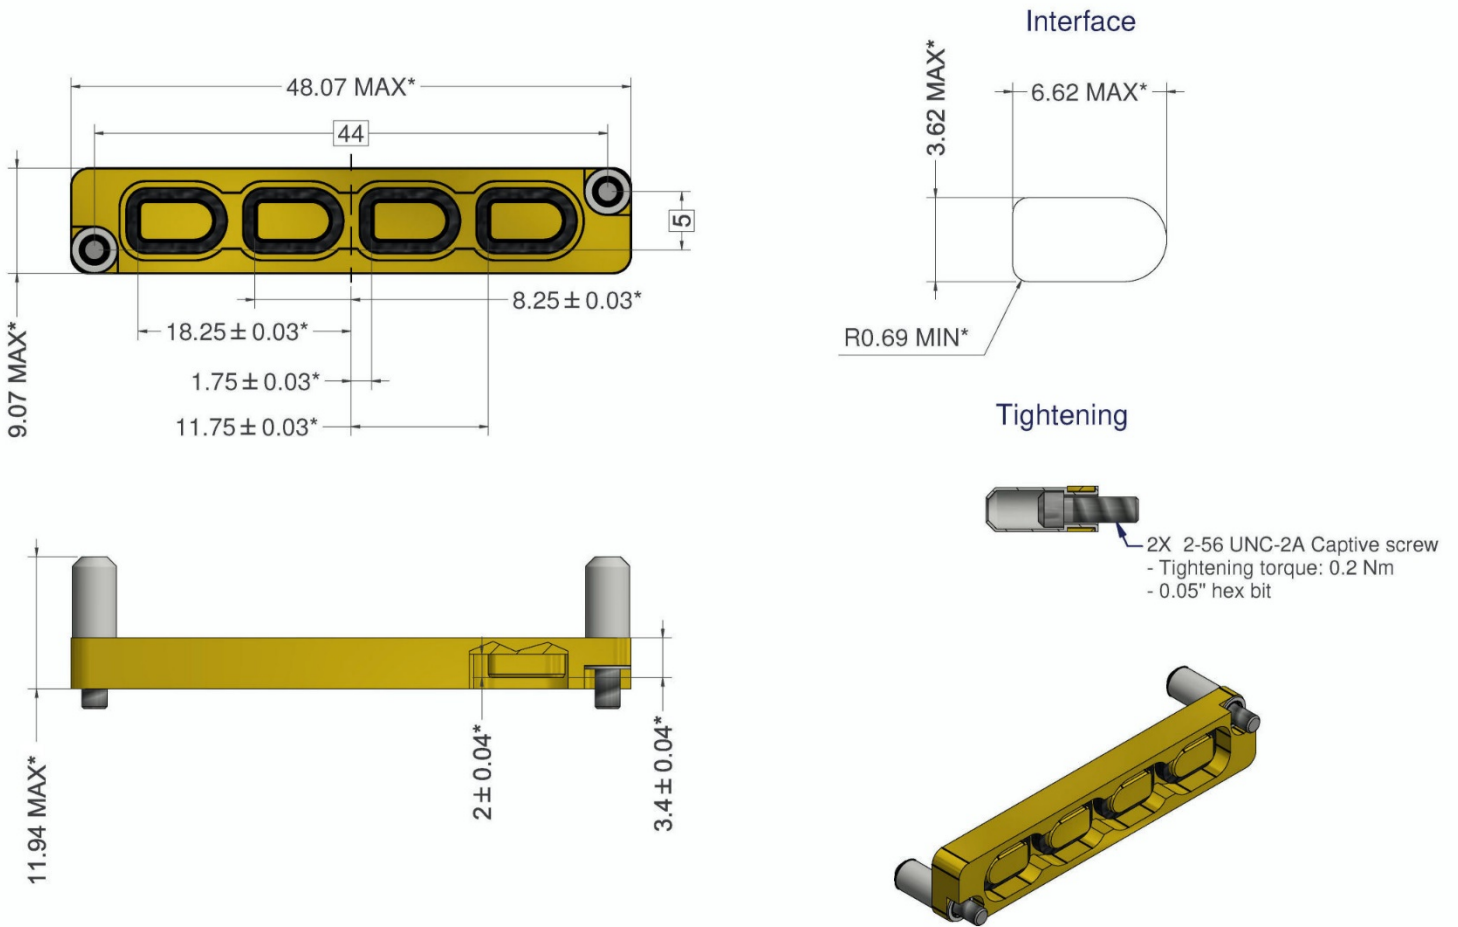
(e) – VARIANT 05 - BLANKING PLATE, AXOMACH HDR, 2 WAY
